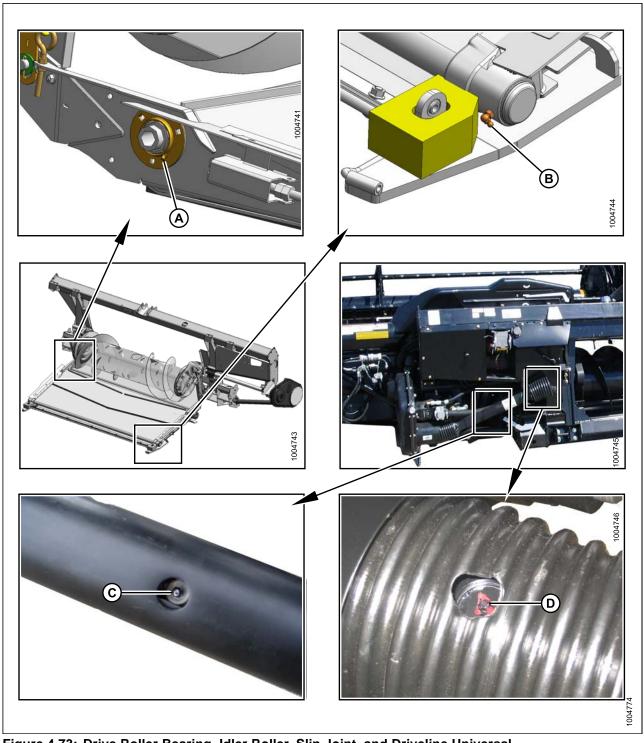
Drive Roller Bearing, Idler Roller, Slip Joint, and Driveline Universal
